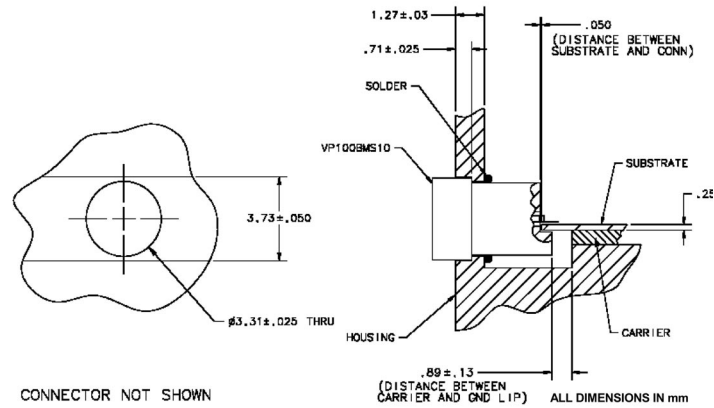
VP100BMS10 Mounting Hole Dimensions and Assembly for a Thin Wall Housing
